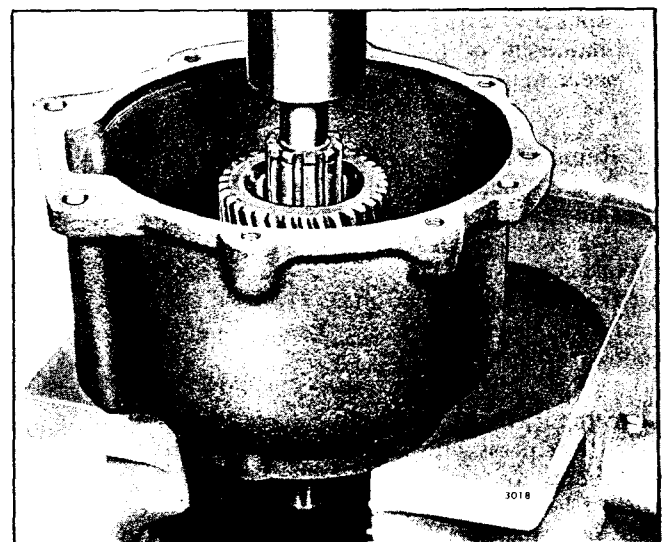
Removing Reduction Gear Drive Shaft Roller Bearing Cone and Cup from Gear Housing (1.5:1 Ratio)
